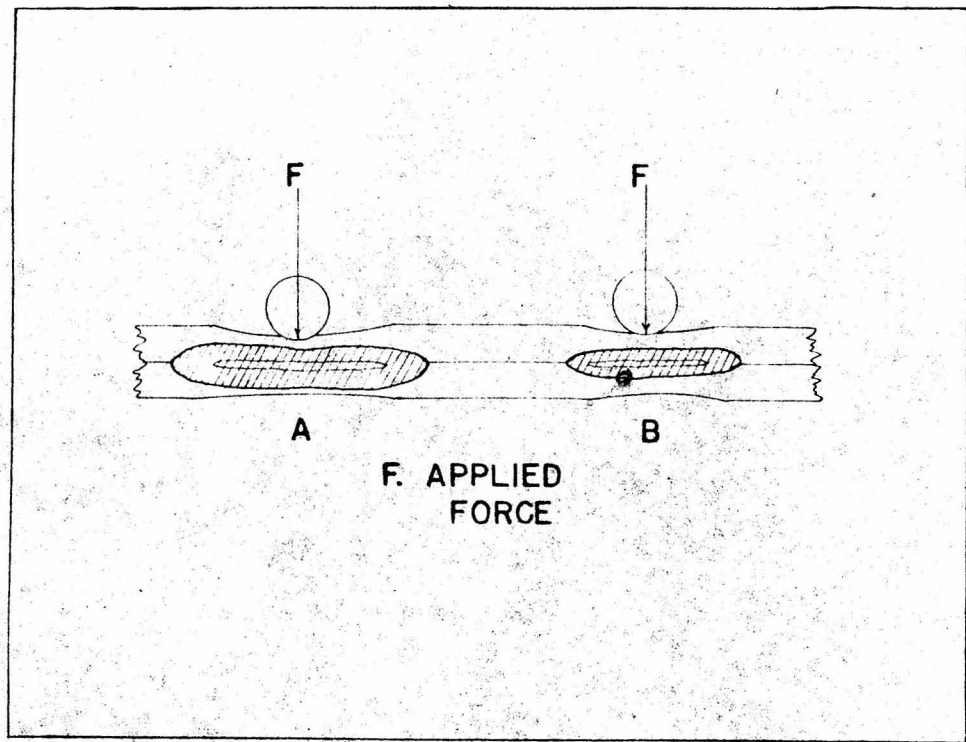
ONE POINT ONE SIDE PENETRATOR TEST OF SPOT WELD NUGGET PENETRATION. GREATER INDENTATIONS RESULT OVER LARGE NUGGETS (A) THEN OVER SMALL NUGGETS (B).
